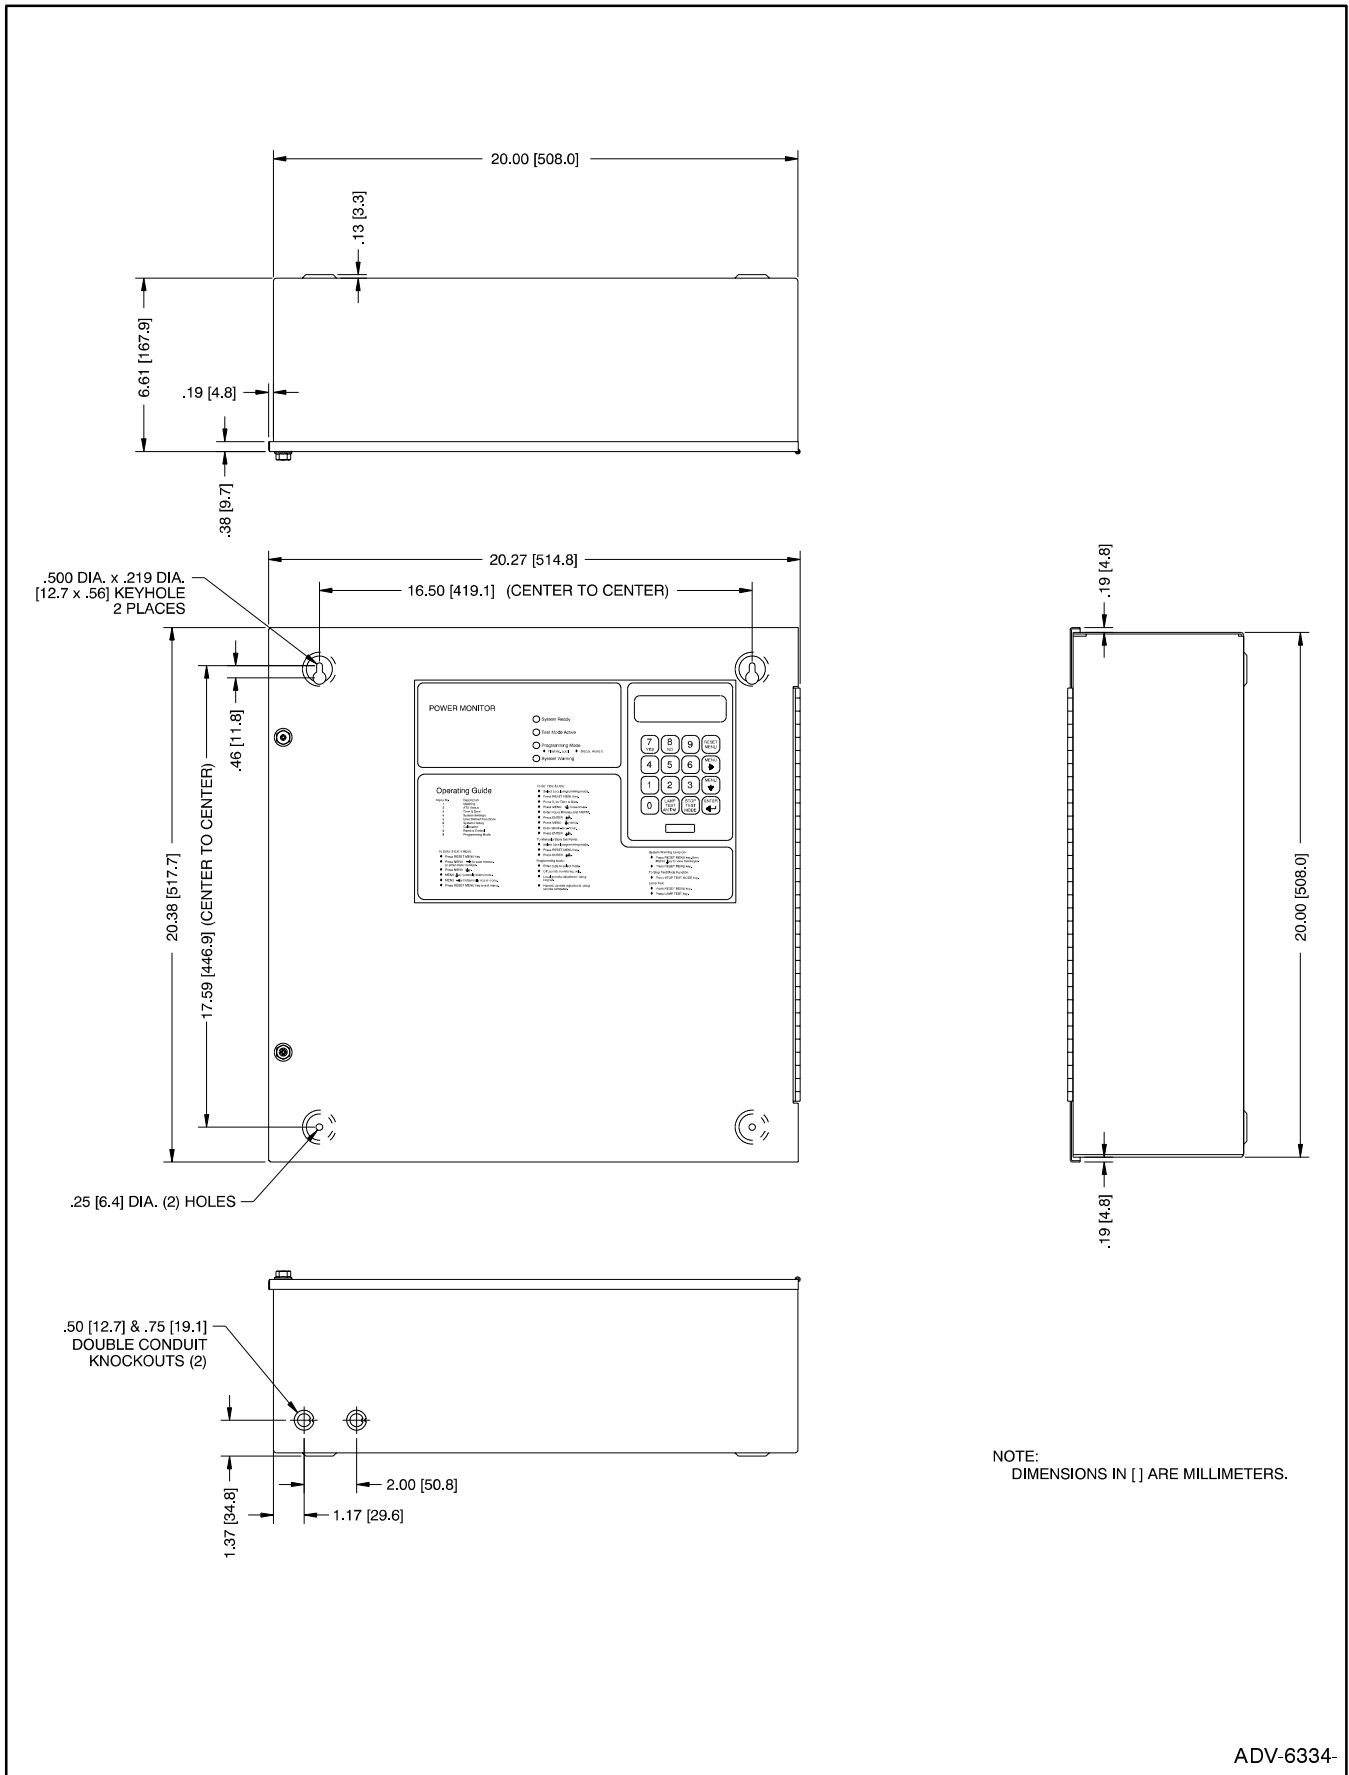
Power Monitor Enclosure Dimensions Drawing
